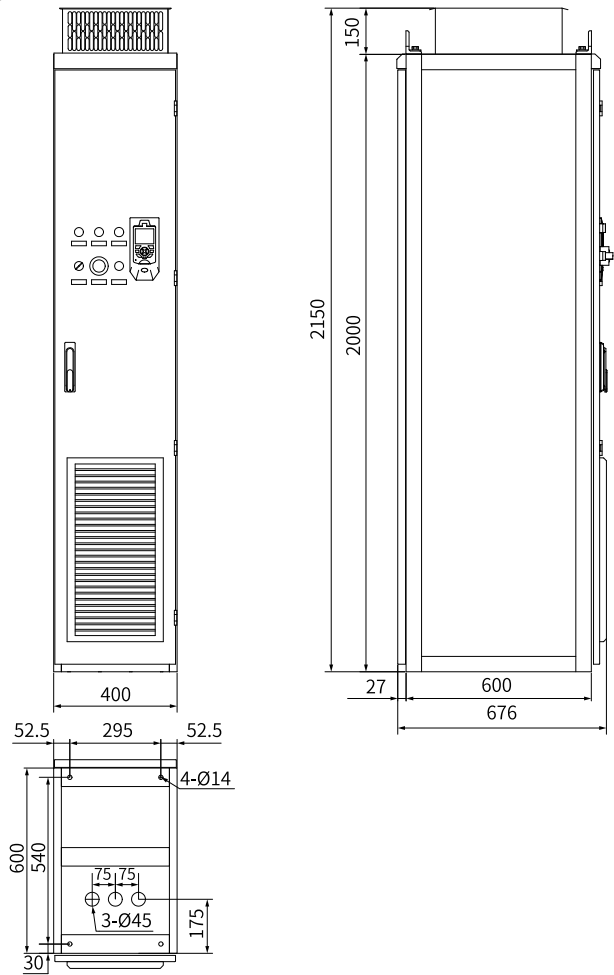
400-mm wide auxiliary cabinet (mm)
